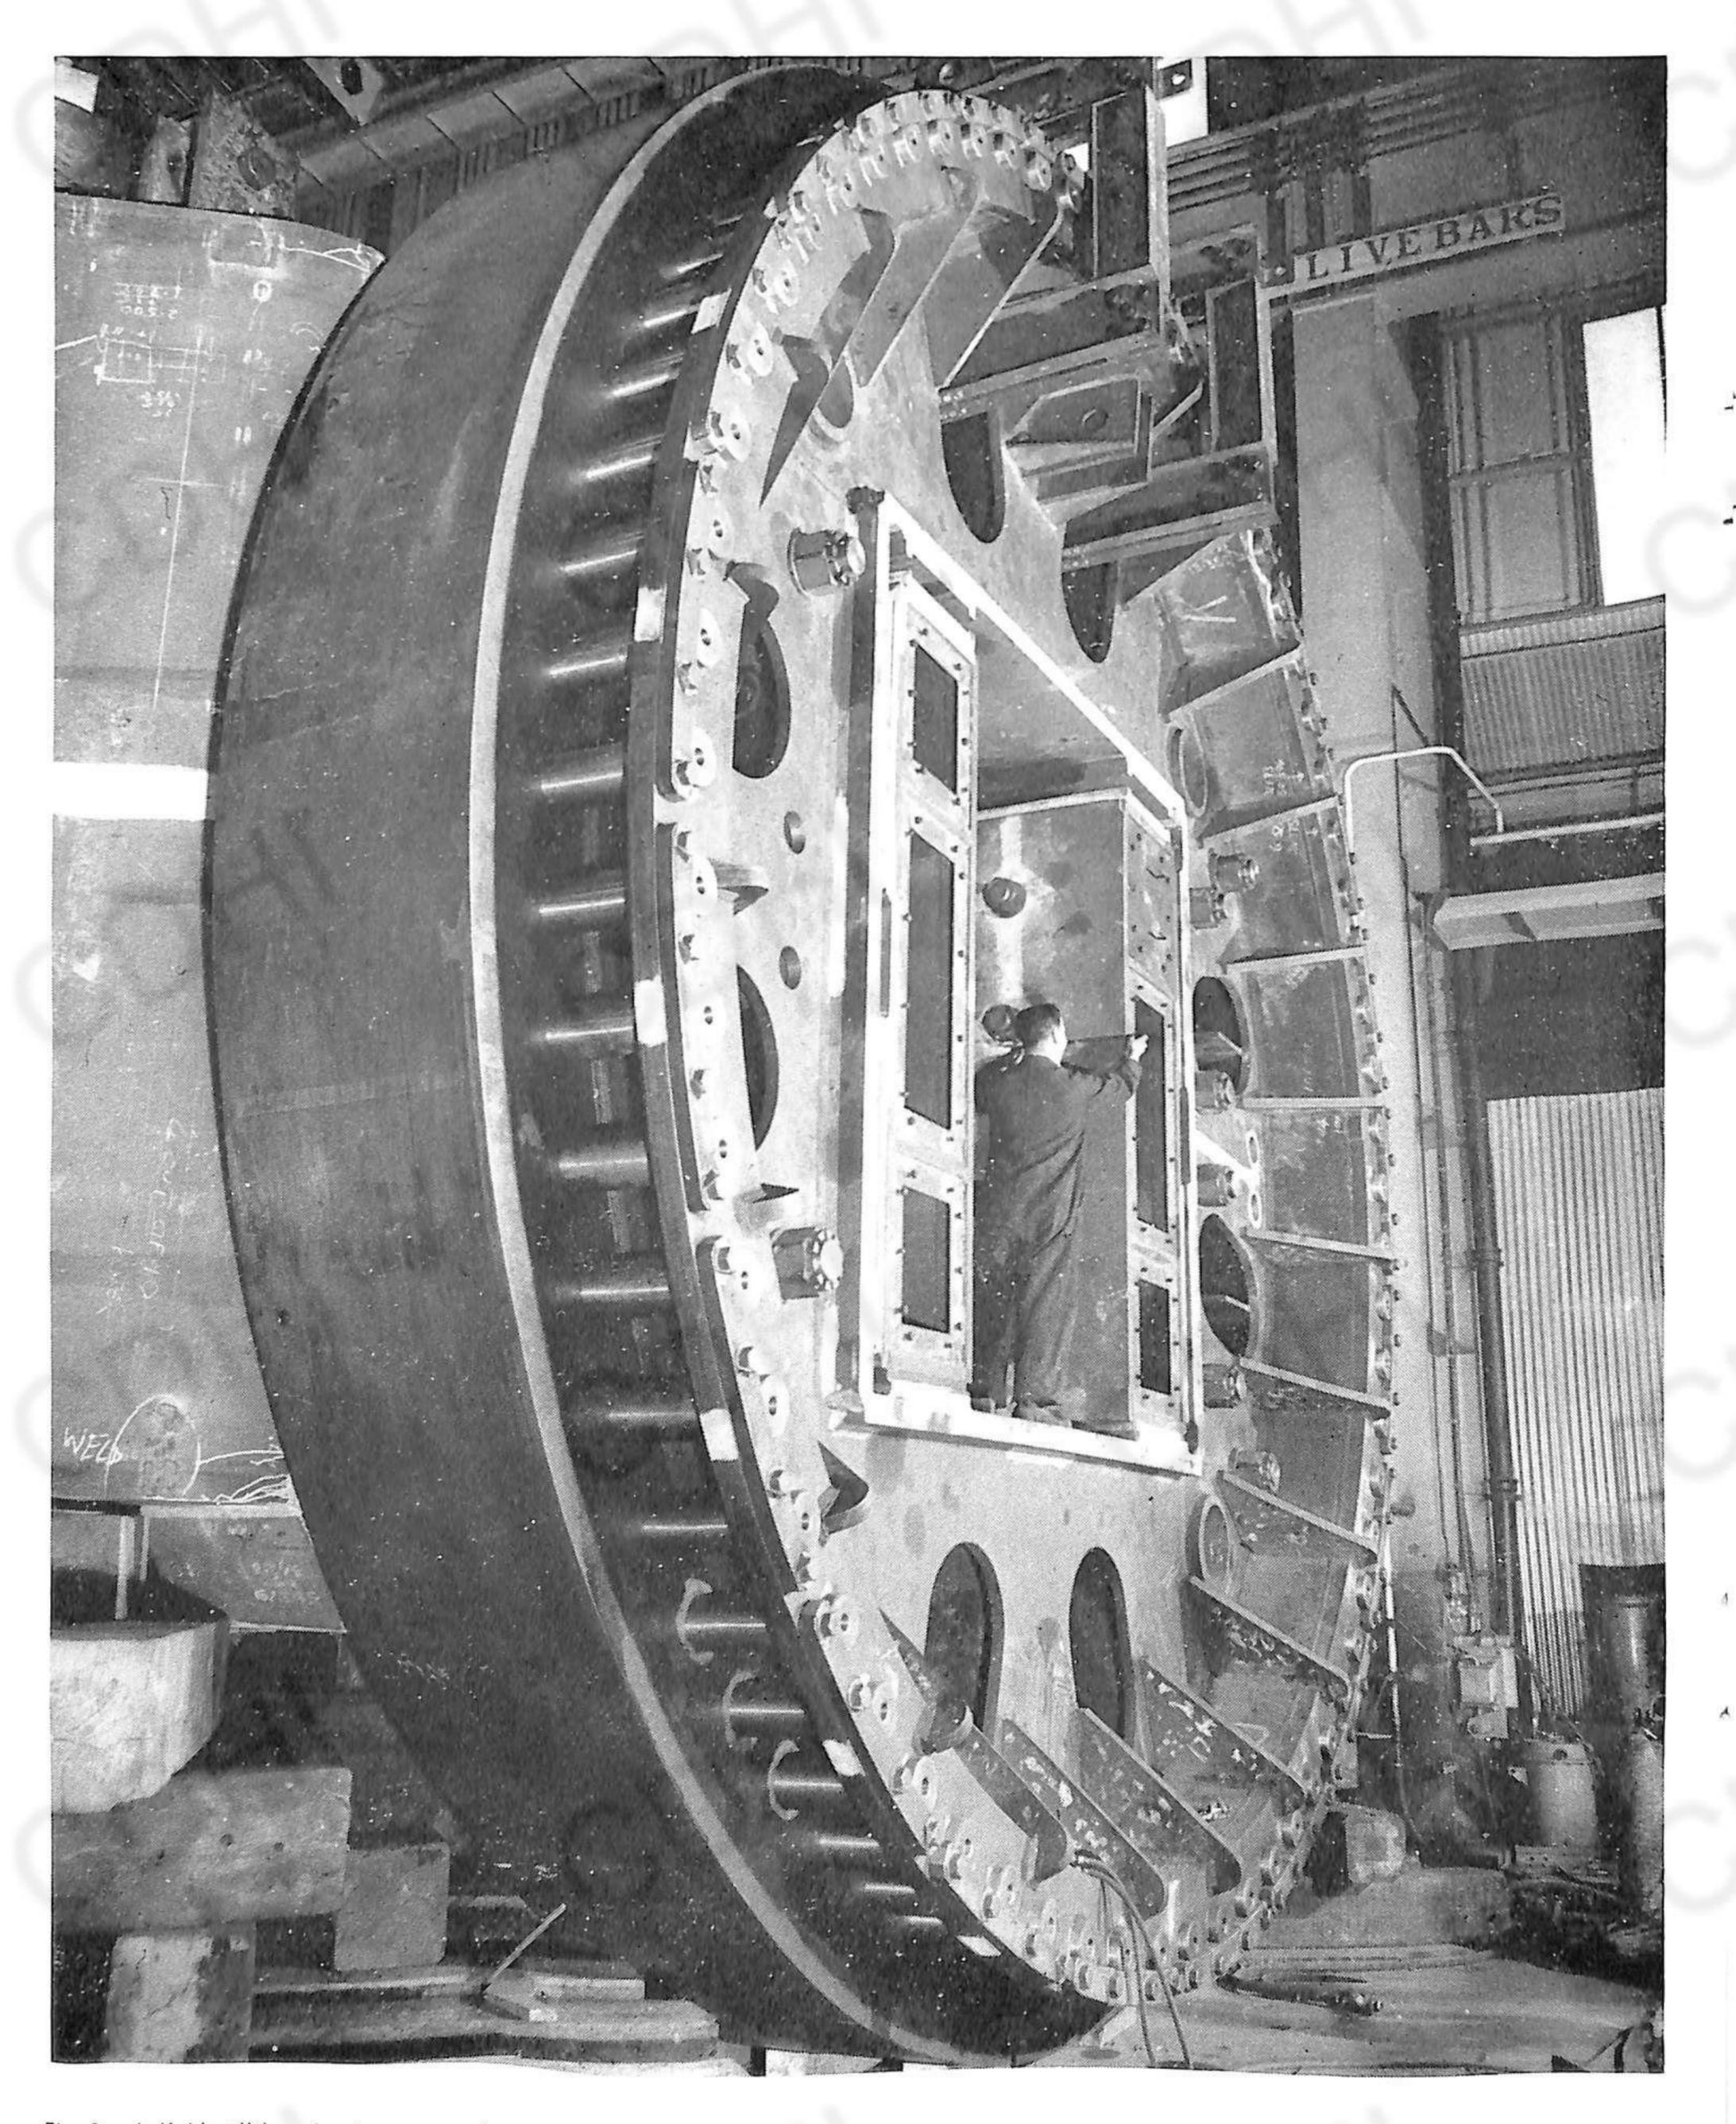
A Kaldo tilting ring in course of manusacture at the Head Wrightson works
